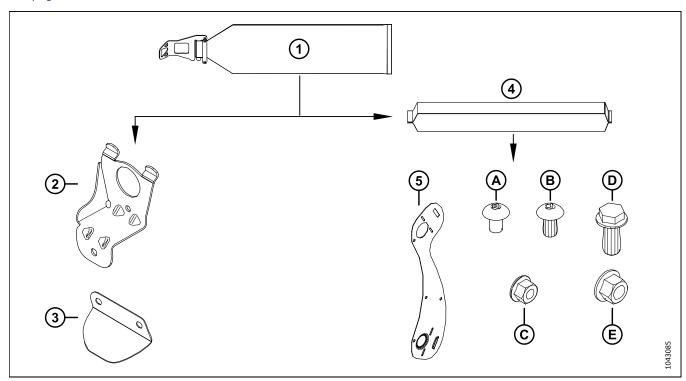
Six-Bat Reel Endshield Parts Bag MD #368323
